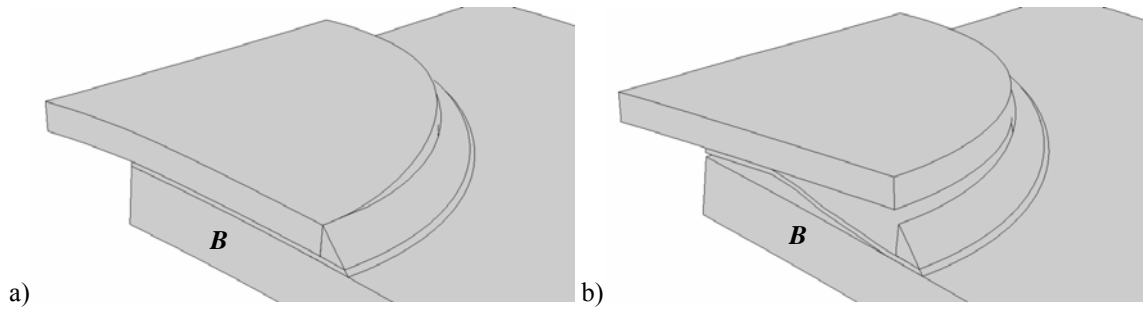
Deformed shape of the 45° straight fillet repair at damage onset (a) and patch debonding (b) (compressive load).
